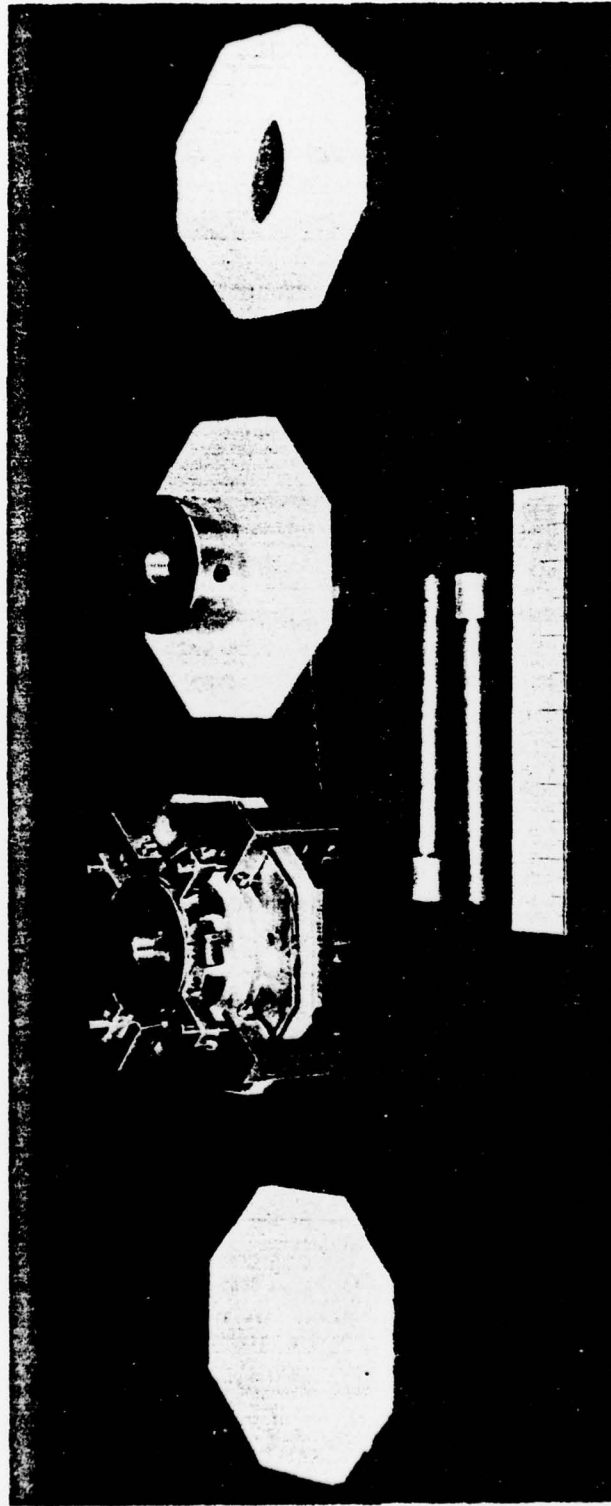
Polyethylene specimen blank, damped specimen, finished specimen and tested specimen. Rods are wrenches used in removing specimen from press.
